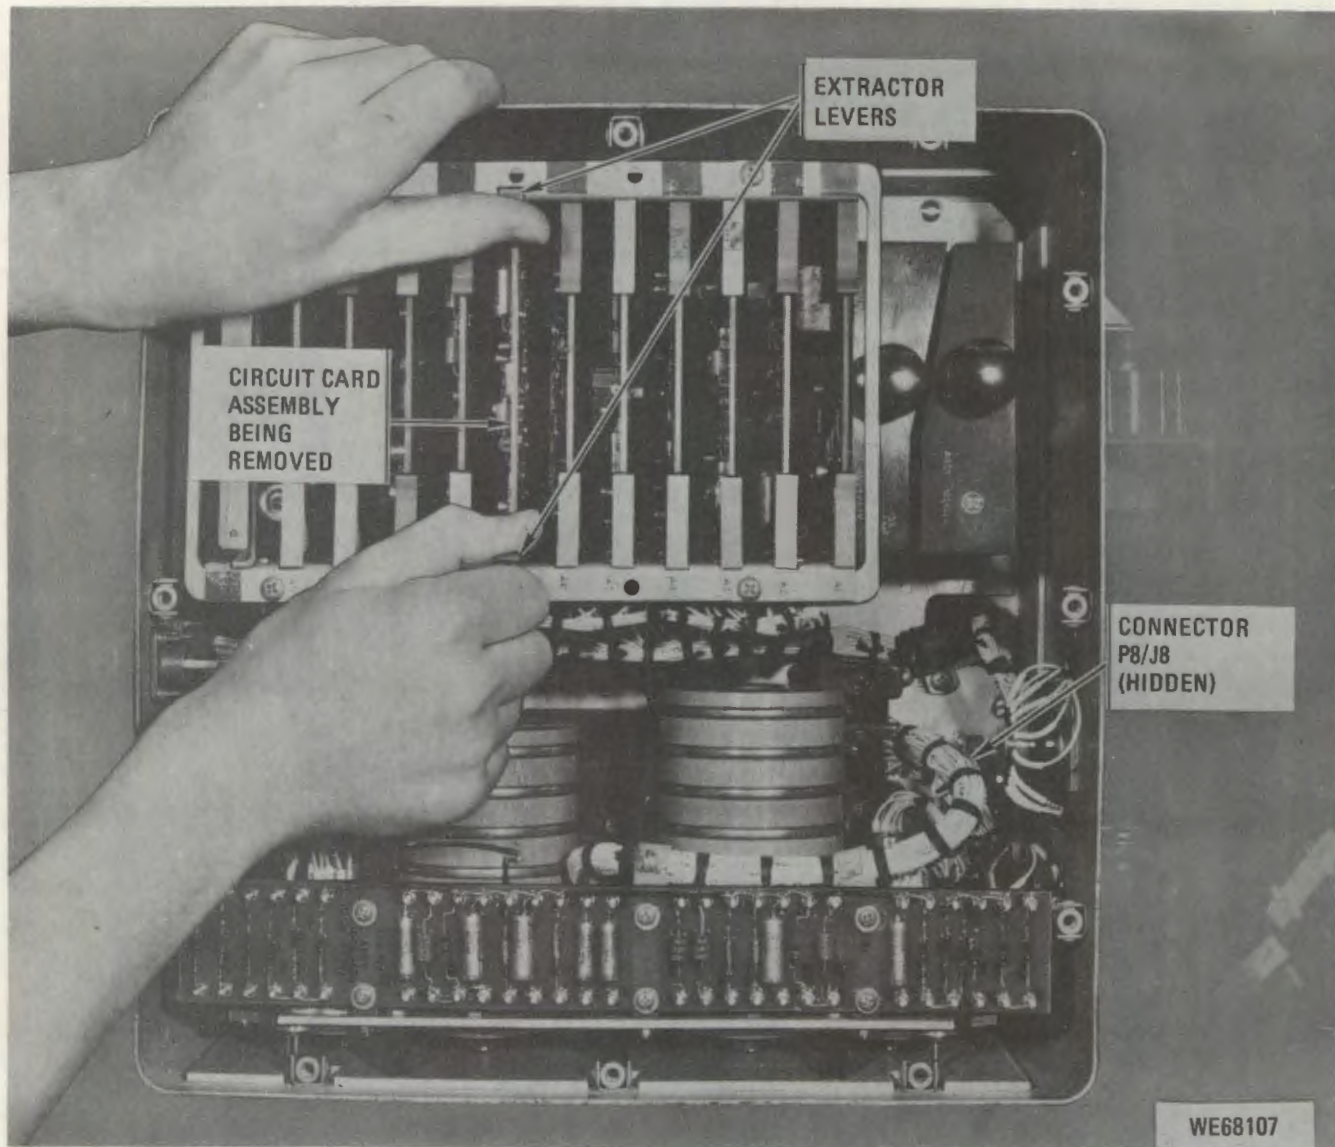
Sight current generator, removal of typical circuit card assembly.
